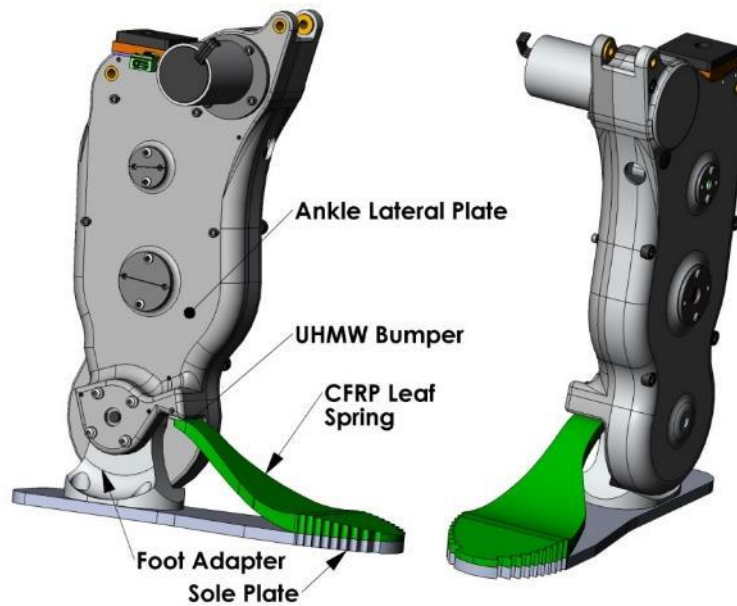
CAD rendering of spring foot design and ankle assembly.
